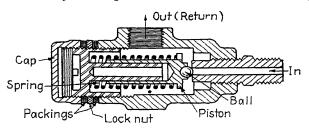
Fluid relief valve. (Courtesy of Douglas Aircraft Co.)
